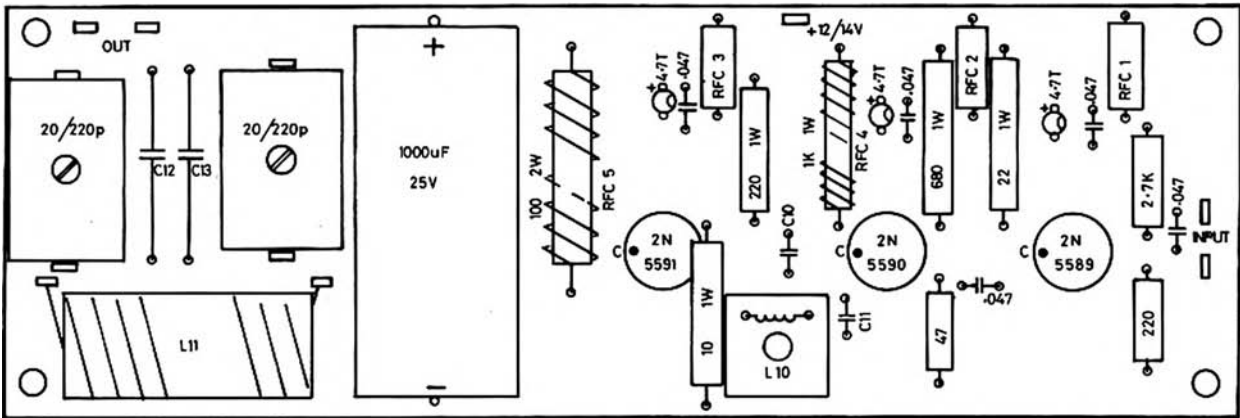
UNIT E - COMPONENT LAYOUT
